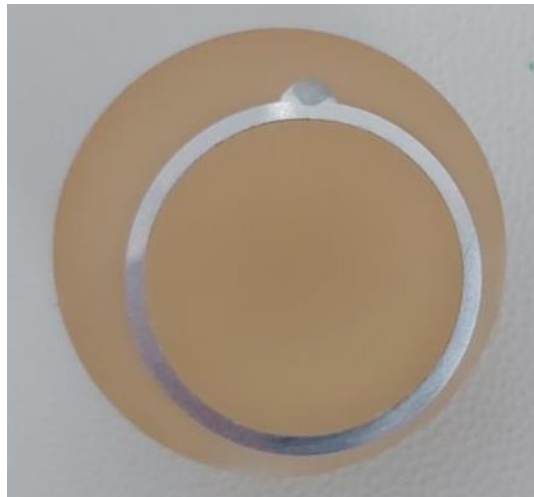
Macrograph of the second welding of the 7005-T6 pipe.
